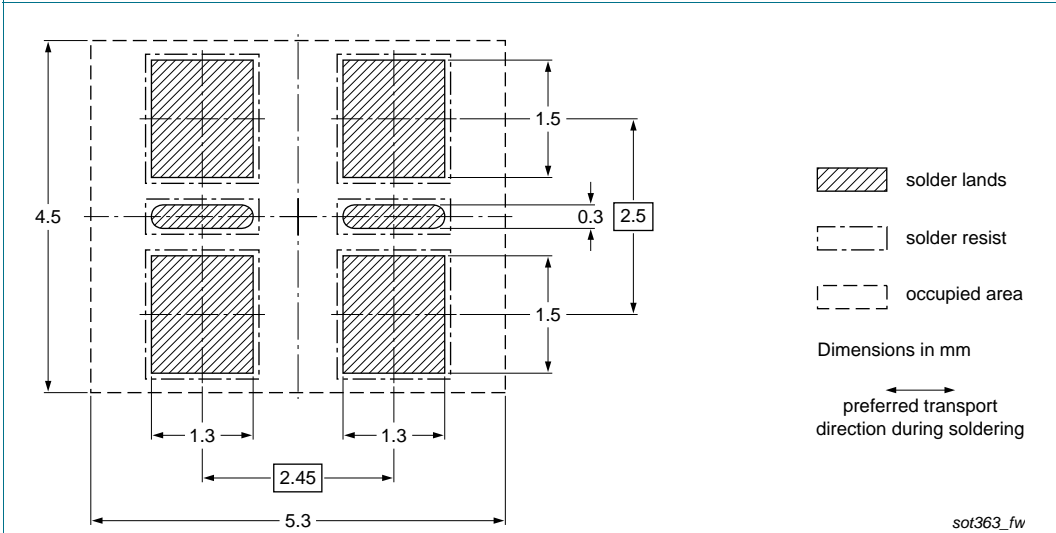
Wave soldering footprint PUMB10 (SOT363/SC-88)
